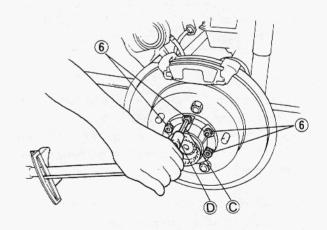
Special Tool © (Hexagon Bit 6mm 09900-00414) Special Tool © (Hexagon Socket 09900-00411)
